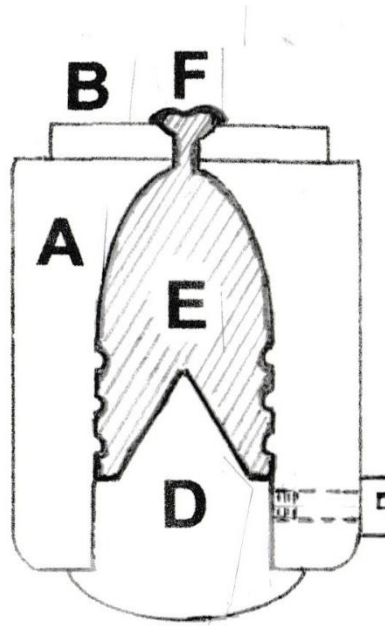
A is the face of one of the mold blocks. B is the sprue cutter. D is the plug. E is a cross-sectional view of a molded bullet sitting in the mold block. F is the bullets sprue. The plug screw is in the block at lower right. Illustration by Author.
